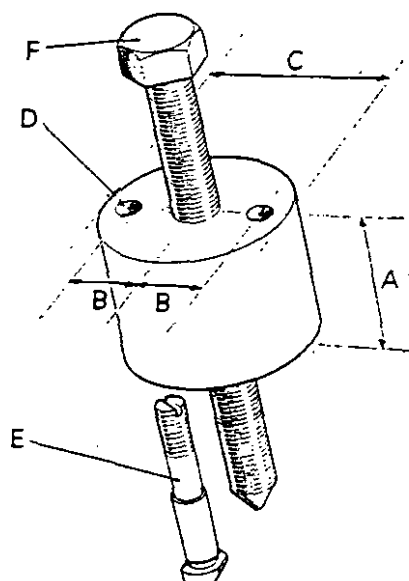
TOOL FOR REMOVING OUTER SPUR PINION BEARING — 770 TRACTOR
